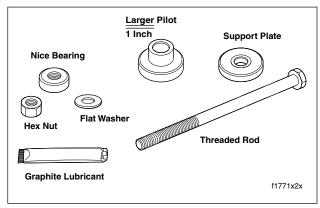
Front Wheel Bearing Installer Tools (Part No. HD-44060)
